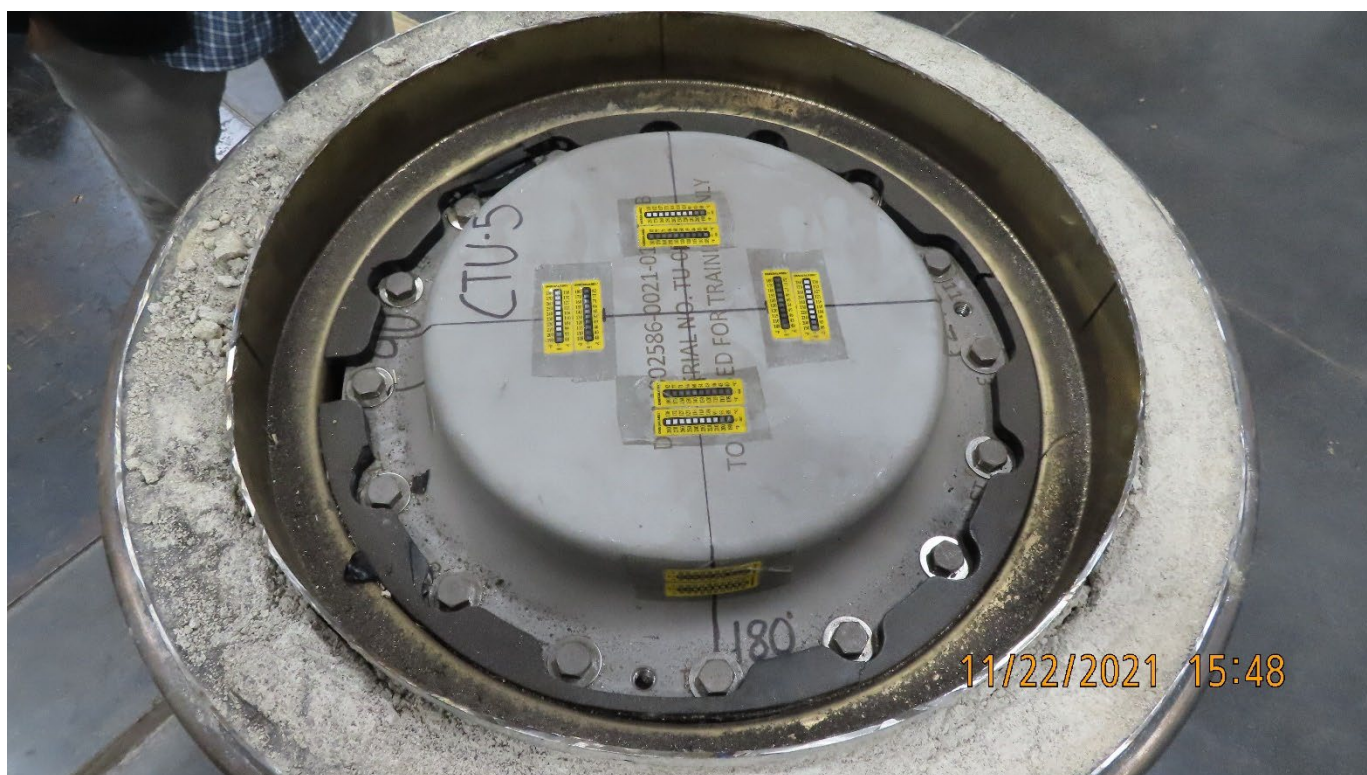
TU-5 drum body cut to remove lid and CV.
